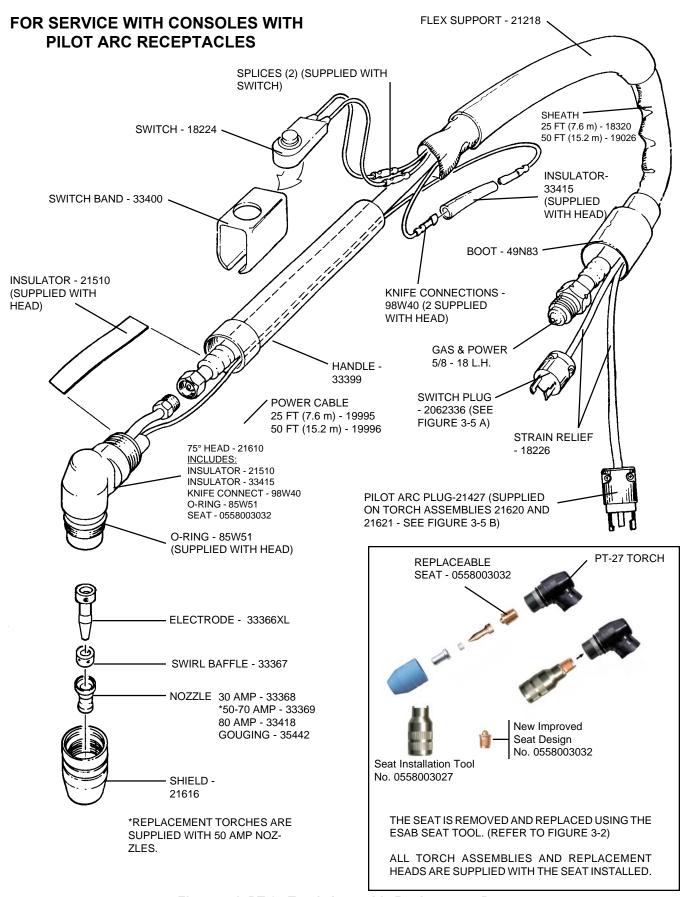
PT-27 Torch Assembly Replacement Parts
